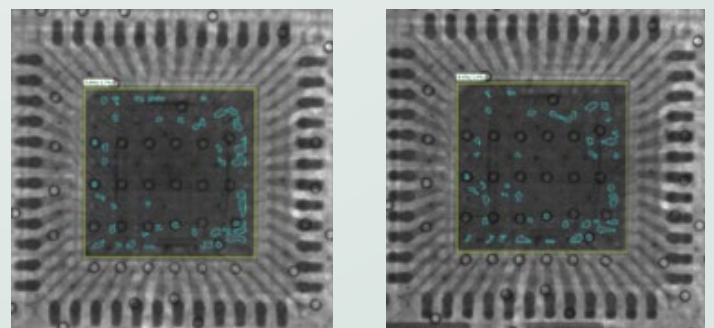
With solder preforms being used to replace solder paste, the voiding rate is 3-6%, with single largest void being just about 0.7%.
